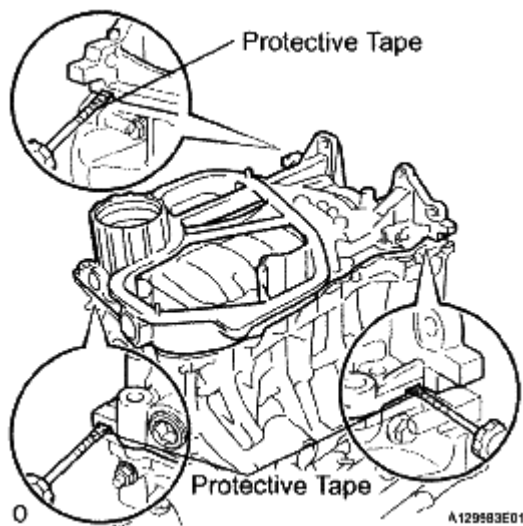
Prying Between Oil Pan & Cylinder Block With Screwdriver
